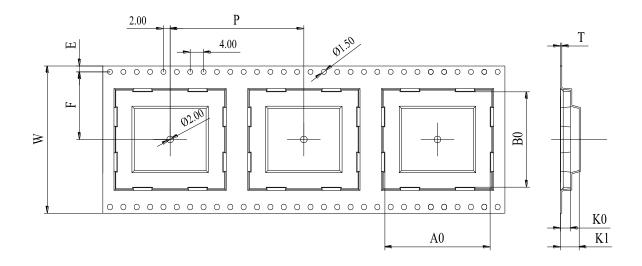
Carrier Tape Dimension Drawing (Unit: mm)
